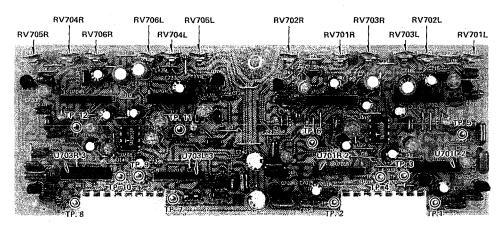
dbx NR PCB (V-900X/V-800X)
